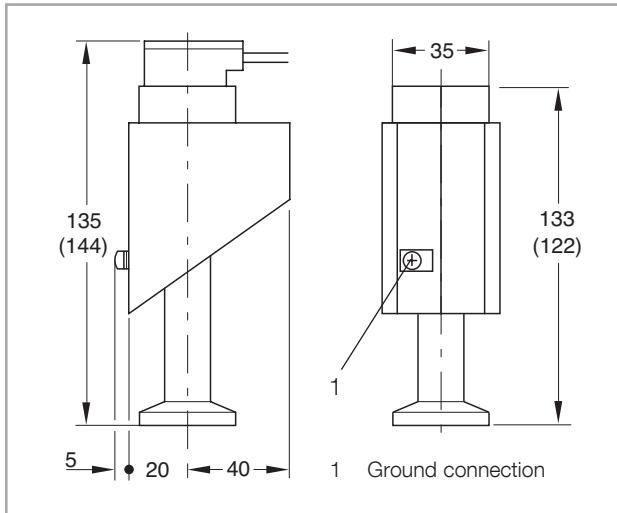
Dimensional drawing TR 211 / TR 212 / TR 216
